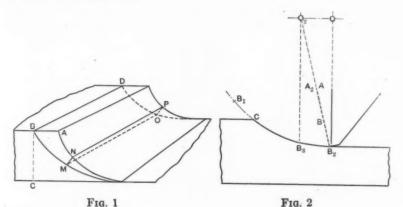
Metal Chip Assumed to be Produced by Milling-Cutter without Distortion
